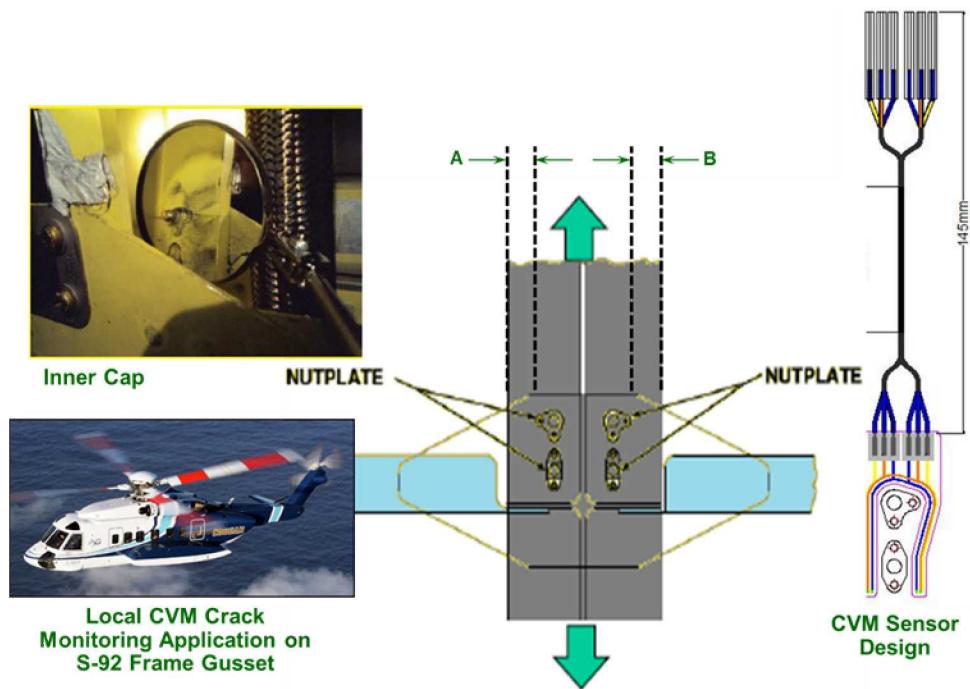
Sample Rotorcraft Application Deploying CVM System to Monitor Cracks on Rotorcraft Component
